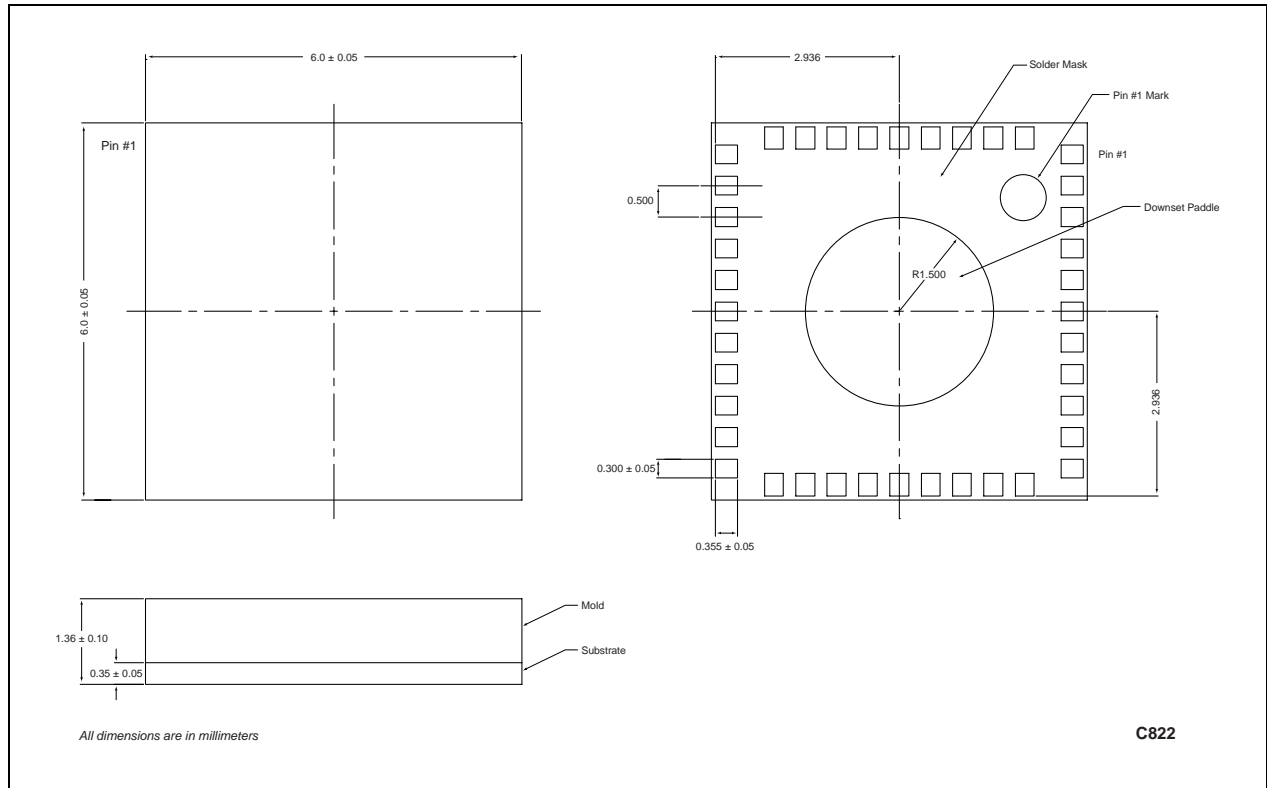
RF25A Package Dimensions - 40-pin LGA 6 x 6mm Package
